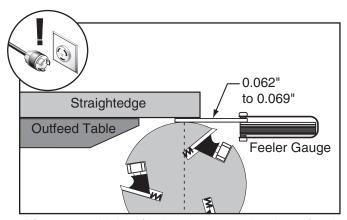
Using feeler gauge to check outfeed table-cutterhead height.
